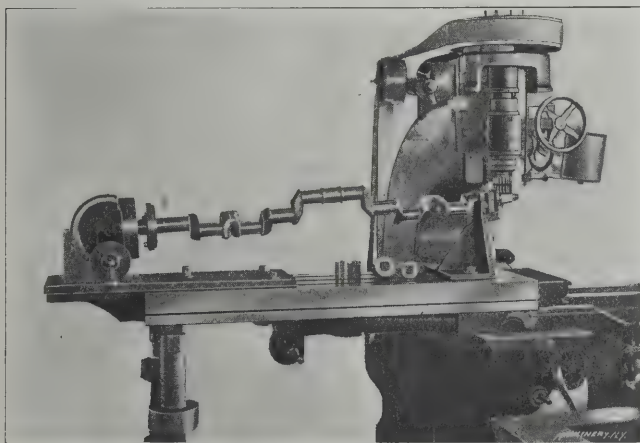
A Vertical Milling Machine set up for Milling the Tapered Square Drive on the Crank-shaft
